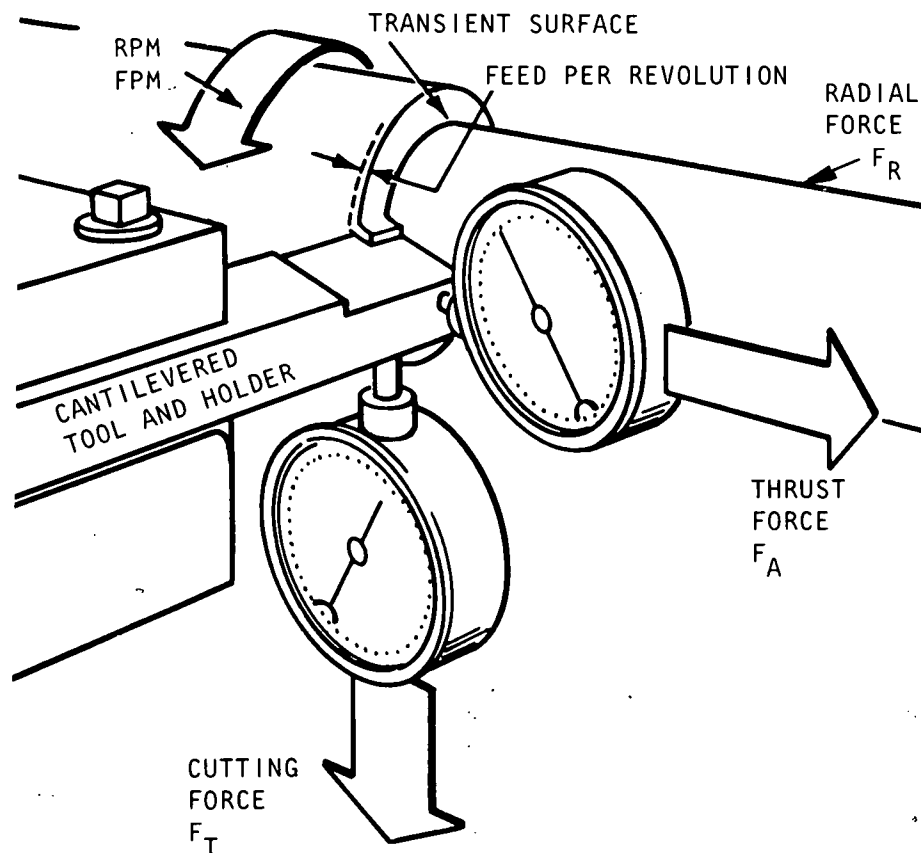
Forces on Cutting Tool During Turning^{1,2}
